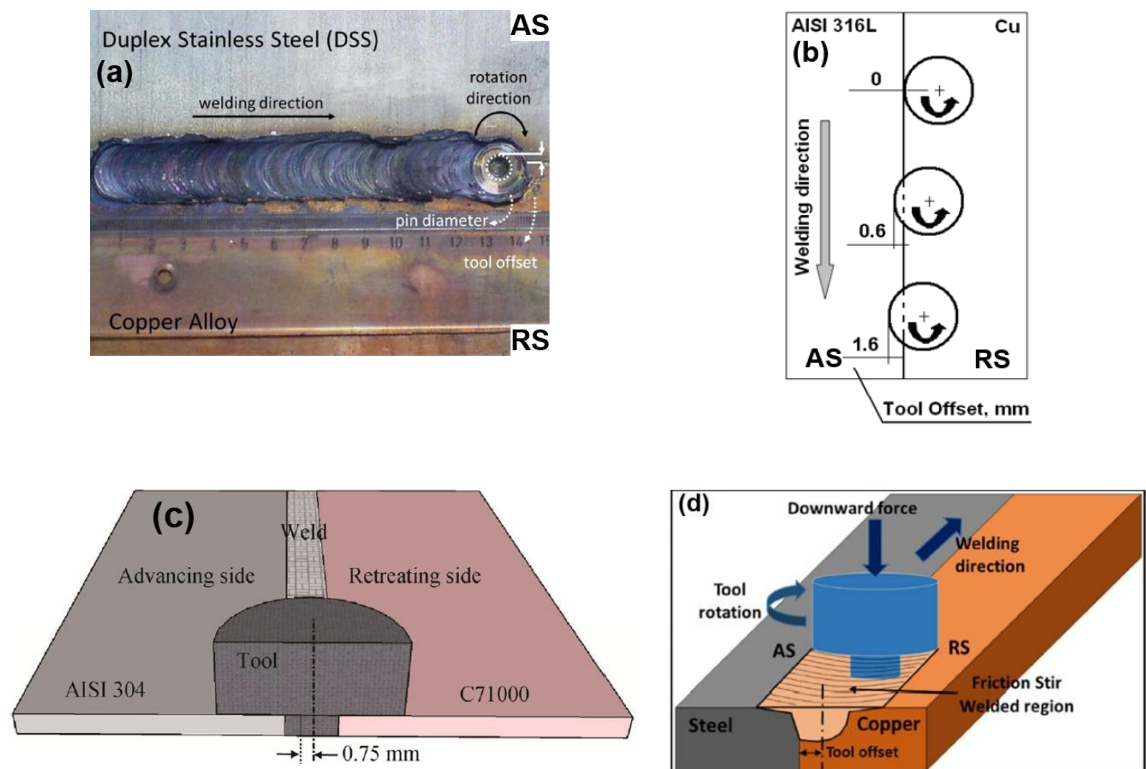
Tool offset conditions reported from previous investigations on FSW (Cu-SS) joints: (a) Shokri et al. [54]; (b) Ramirez et al. [20]; (c) Aval et al. [56]; (d) Wang et al. [32]
